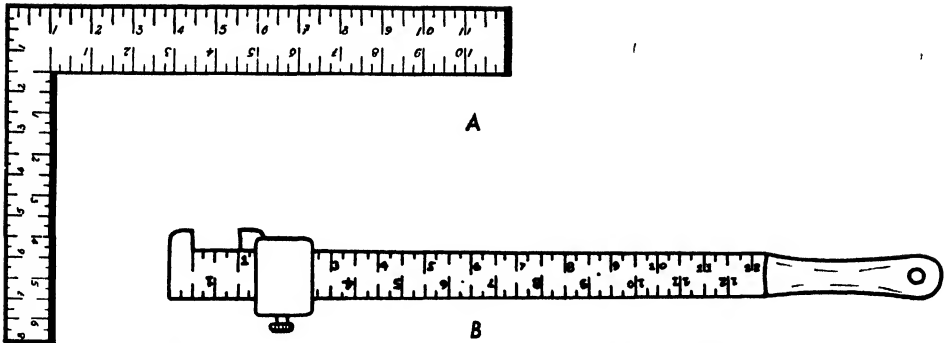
Use metal measuring tools in blacksmithing: A, the small steel square is useful for checking bends and angles as well as for measuring; B, the caliper rule is especially good for measuring the diameter or thickness of bolts, rods, and bars, as well as for general measuring.
